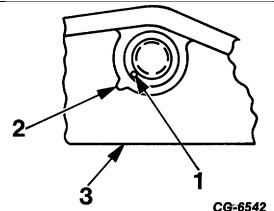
Installation of Oil Pump and Tachometer Drive Shaft Bearing in Crankcase
